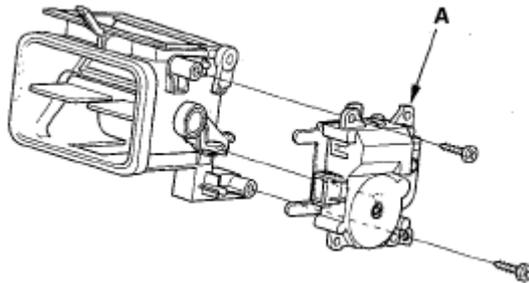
Identifying Rear Vent Control Motor And Fasteners
